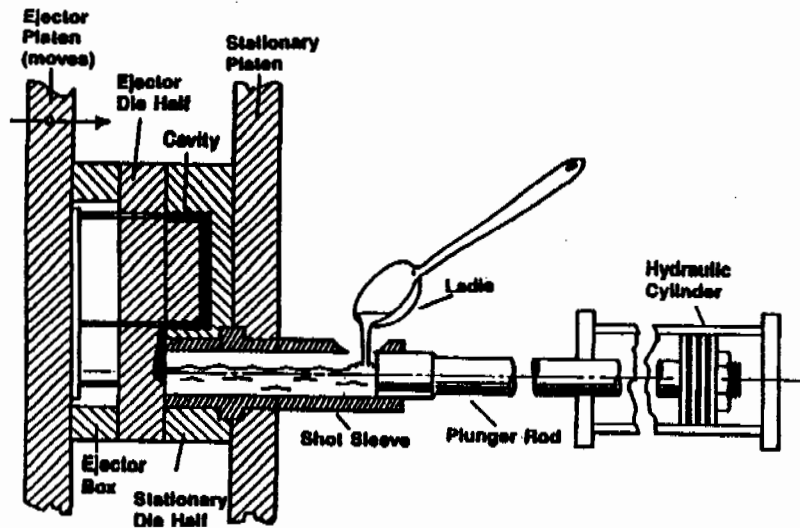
Basic Components of a Typical Cold-chamber Die Casting Machine [16]
